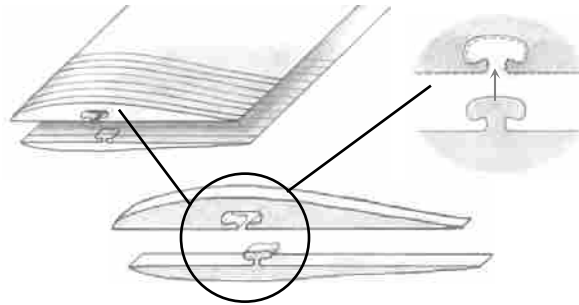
Wingtip view of a sample locking mechanism for two rolling layers of a segmented rolling wing.
